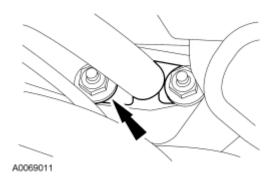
Support Bracket & Nuts Courtesy of FORD MOTOR CO.
